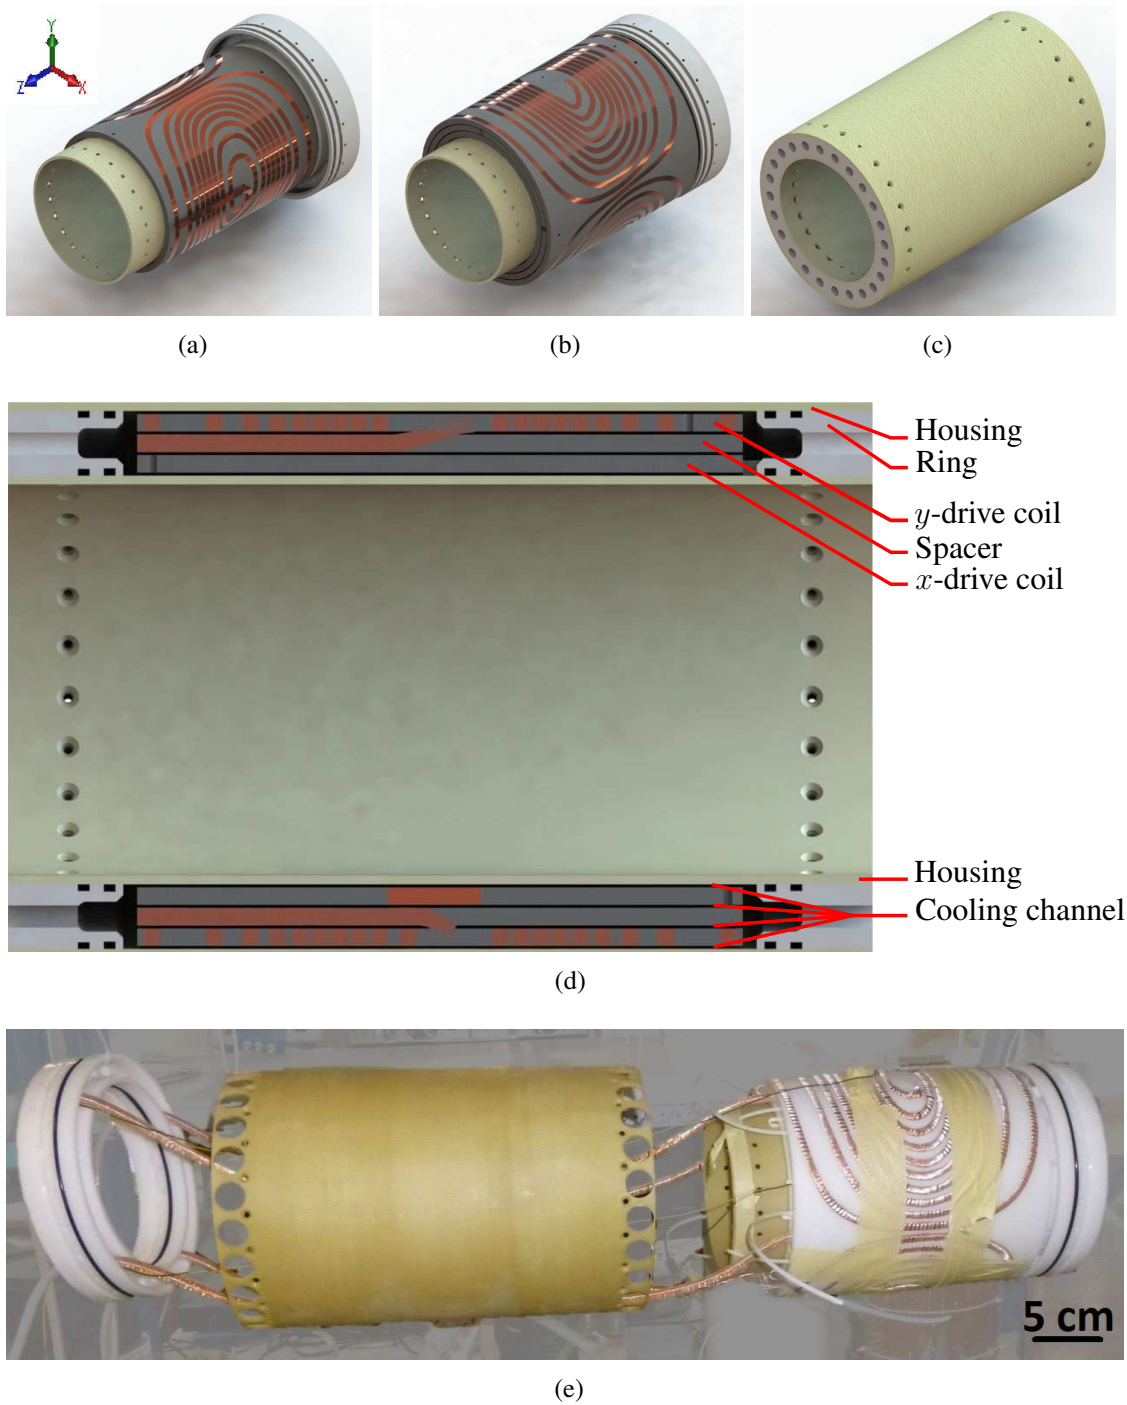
Computer model of the drive coil components. (a) x -drive coil inside its form. (b) y -drive coil inside its form. (c) Housing assembled with the two rings. (d) Cross Section in the yz plan of the whole coil set. (e) Elements before final assembly.
